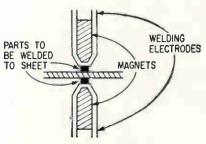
Rod magnets ploced in hollowed electrodes hold small parts during spot welding
